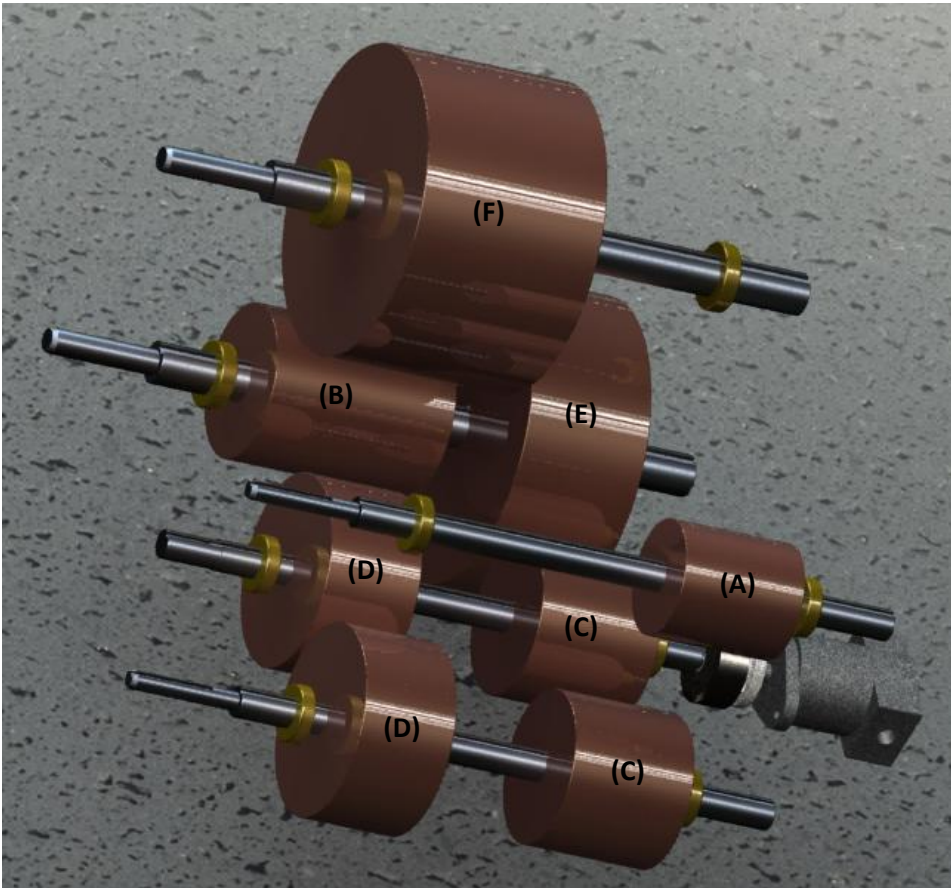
Side view of mechanical input assembly illustrating sheave designation in correspondence to TABLE III [4].
